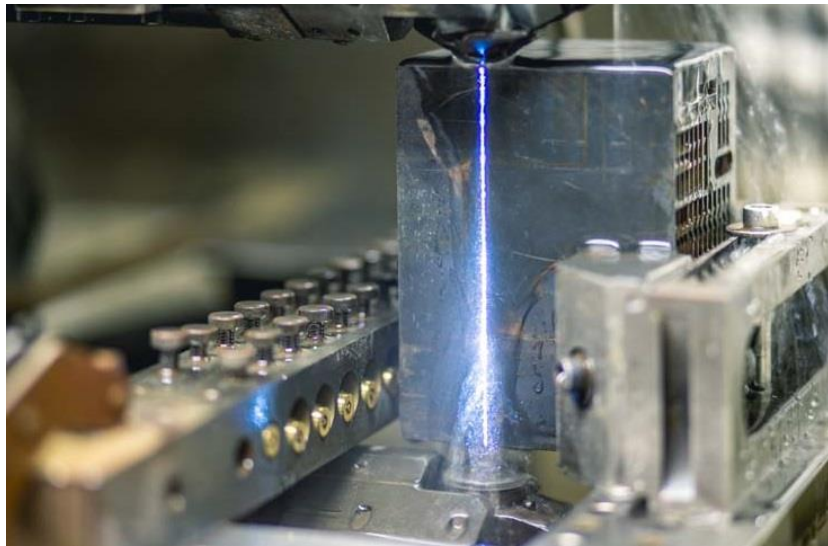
Rough cut wire electric discharge machining process being performed on a metallic material.<sup>9</sup>
